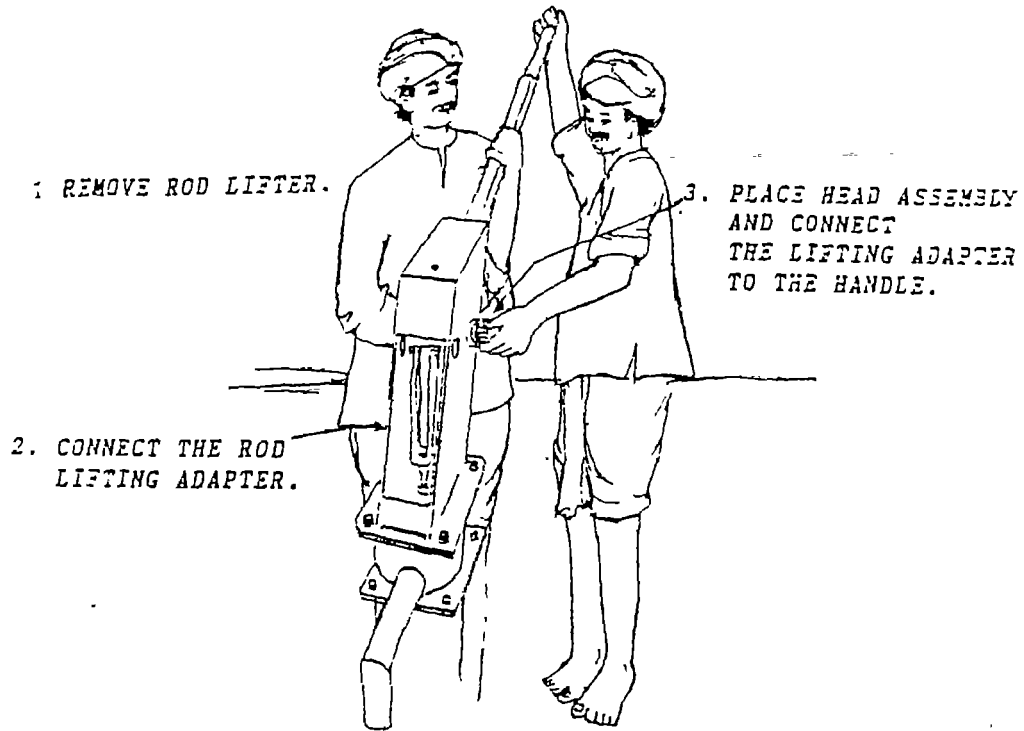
FIX HEAD ASSEMBLY & HANDLE
